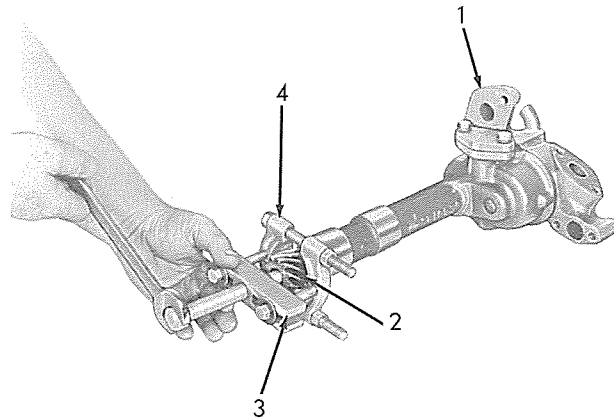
Removing Scavenging Pump Driving Gear (T-20233)
